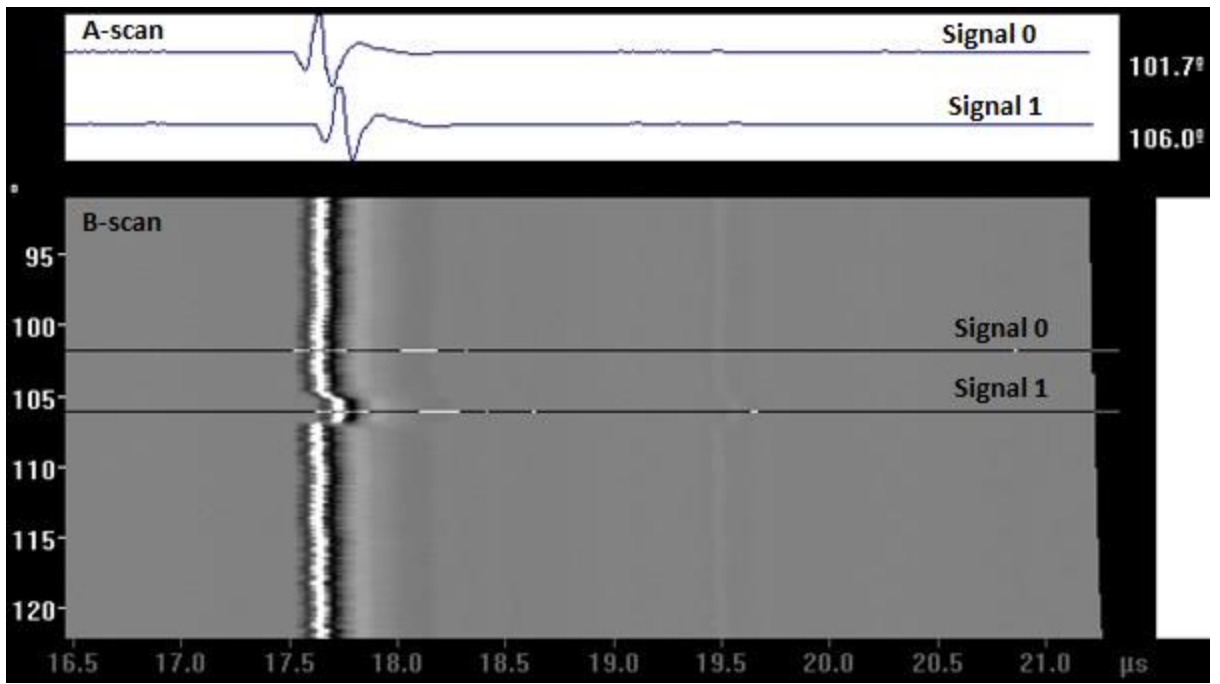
An example of well-focused ultrasonic signals presented using the FLAW analysis package
